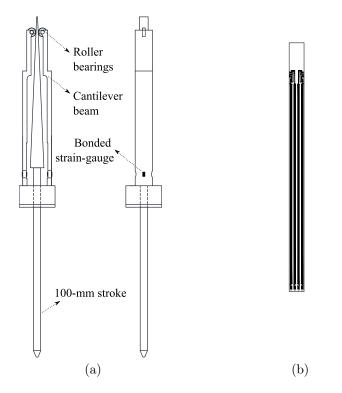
In-house made displacement transducer: (a) Inner design schematic (b) PCB board manufactured for strain-gauge wiring.
